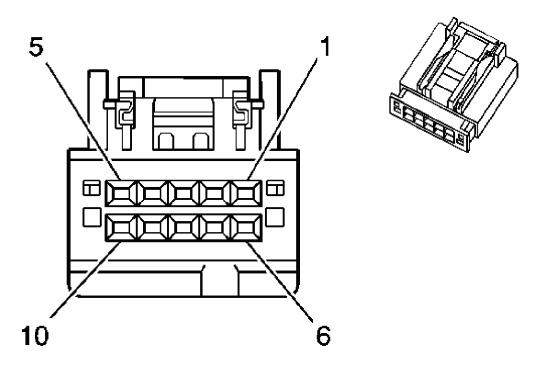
Steering Wheel Control Switch Connector End View - Left
